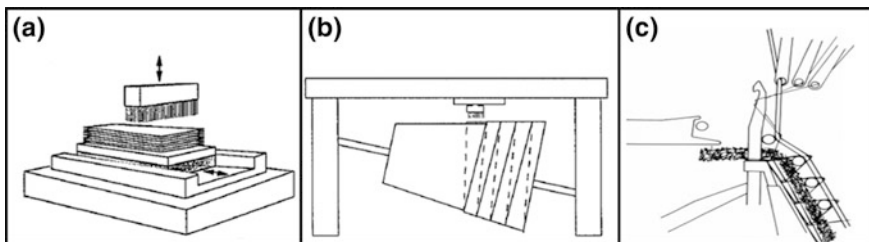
a 3D flat nonwoven machine. b 3D circular nonwoven machine [65, 66]. c Schematic view of 3D biaxially reinforced nonwoven structure made by warp knitting machine [39]
